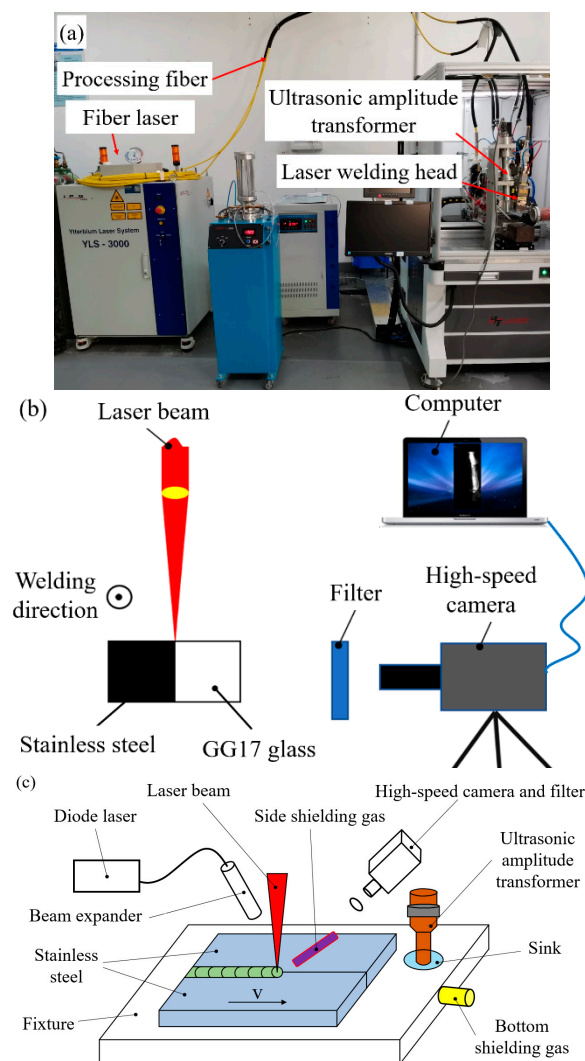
Experimental setup: (a) on-site layout, (b) schematic diagram of welding with “sandwich” specimen and (c) schematic diagram of bead-on-plate welding with ultrasound.
